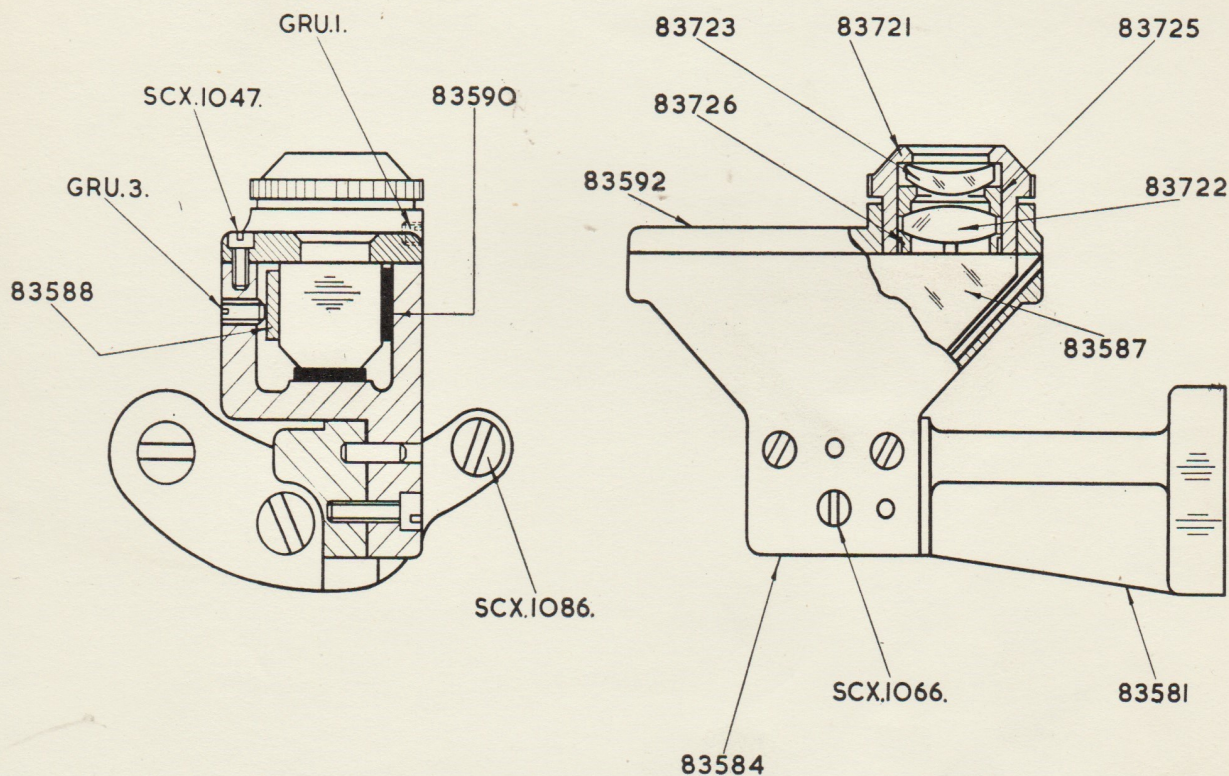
No. 1 PRISM MOUNT, WITH PRISM AND AUXILIARY CONDENSER LENS
